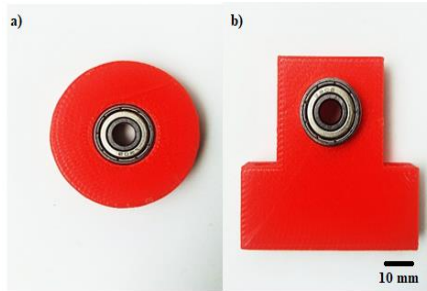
Customized 3D printed parts; pulley (a) and bracket (b) fitted with bearings.
